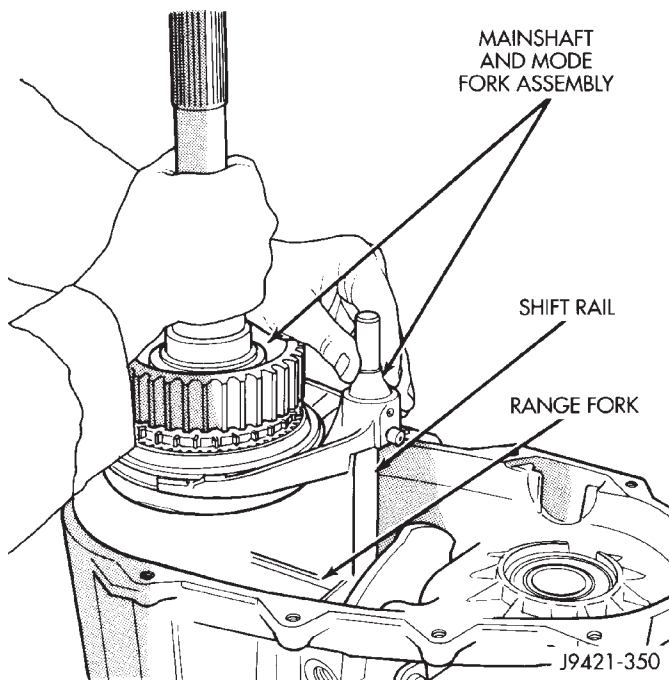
Installing Mainshaft And Mode Fork Assembly
